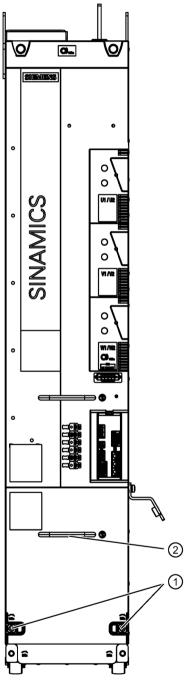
Replacing the fan, Active Line Module and Motor Module Chassis-2, frame size FS2, FS2+, FS4, FS4+
